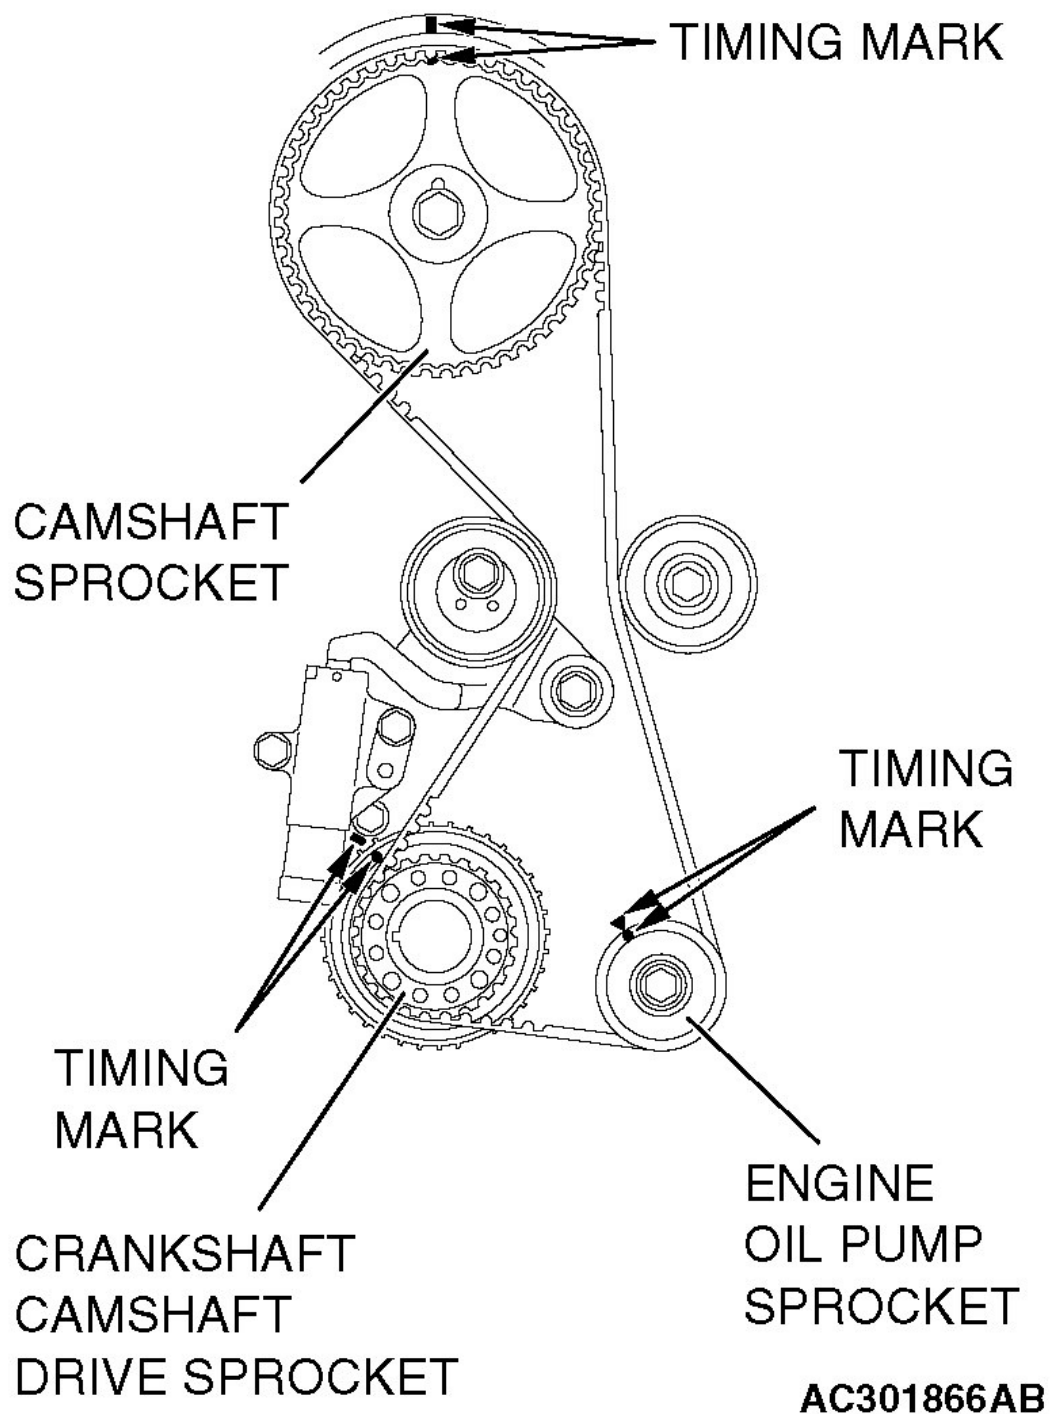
Checking Timing Marks On Sprockets Are Aligned
